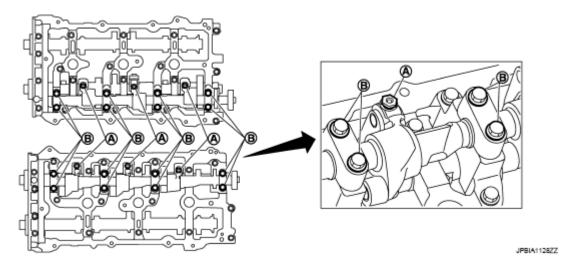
Identifying Adjusting And Mounting Bolts Of VVEL Ladder Assembly Courtesy of NISSAN MOTOR CO., U.S.A.
